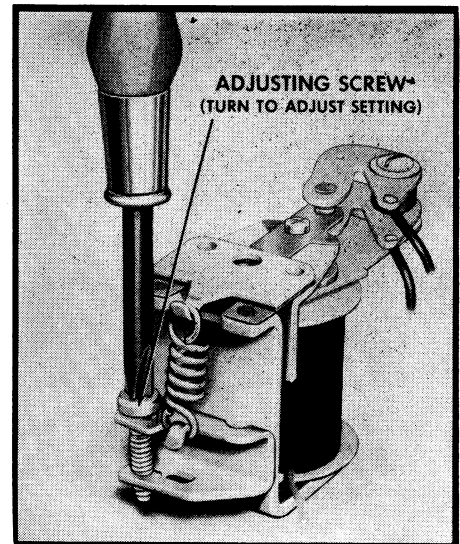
Adjusting voltage regulator setting (lower contacts)
